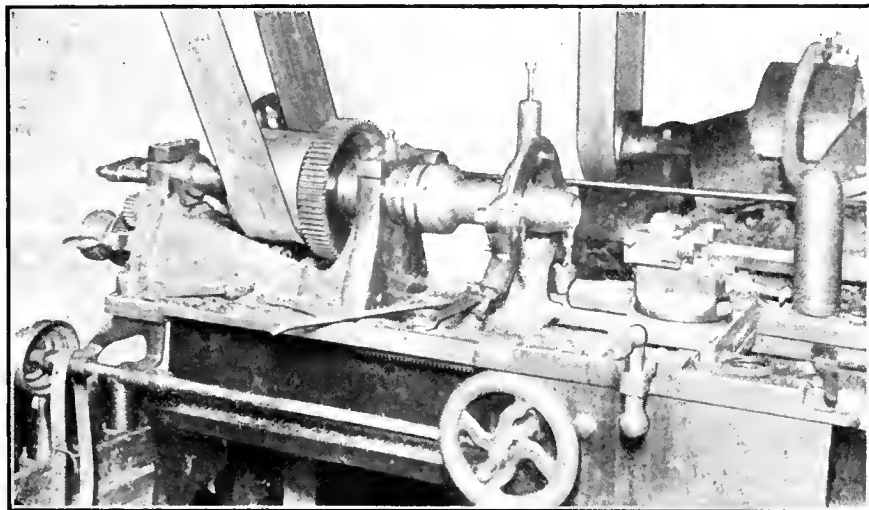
FINISHING NOSE OF FUSE SOCKET ON LATHE WITH SPECIAL DRIVE.
